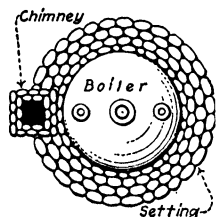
Top view of Newcomen's mushroom-shaped boiler.
